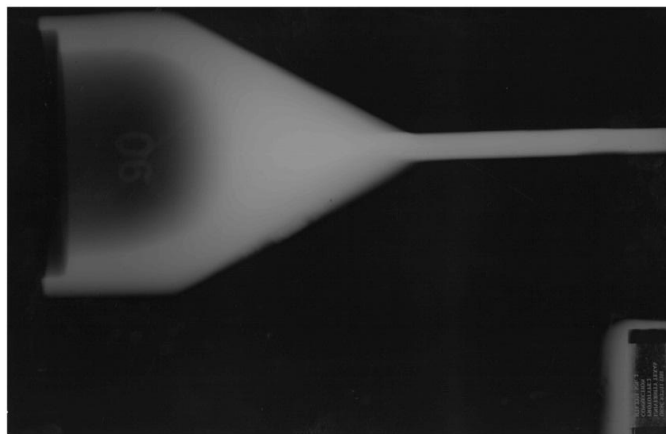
90° X-Ray View of Cast Steel Connection
